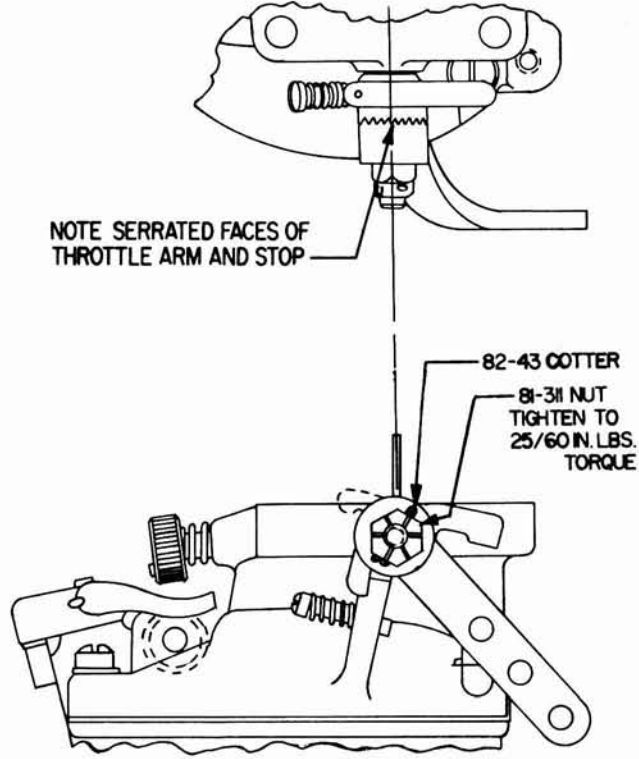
New Throttle Arm Configuration Showing Serrated Faces of Arm and Stop Levers
